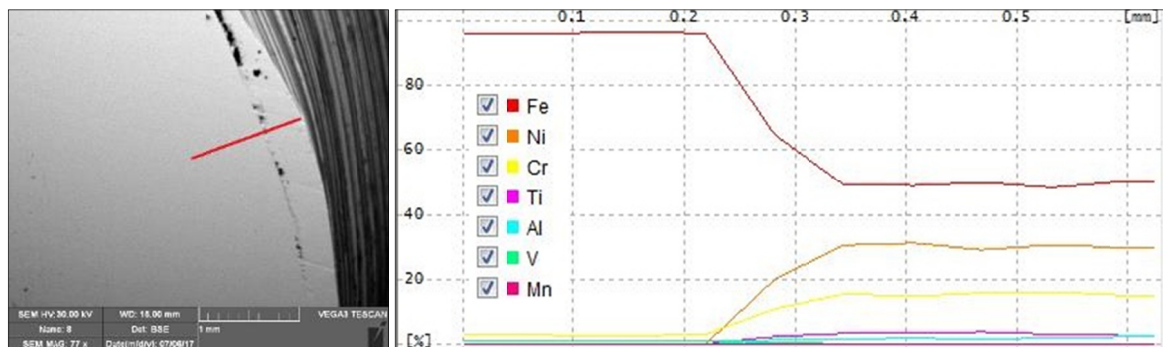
Results of the chemical composition tests in the forging section for a tool which has produced 1900 forgings in zone I
